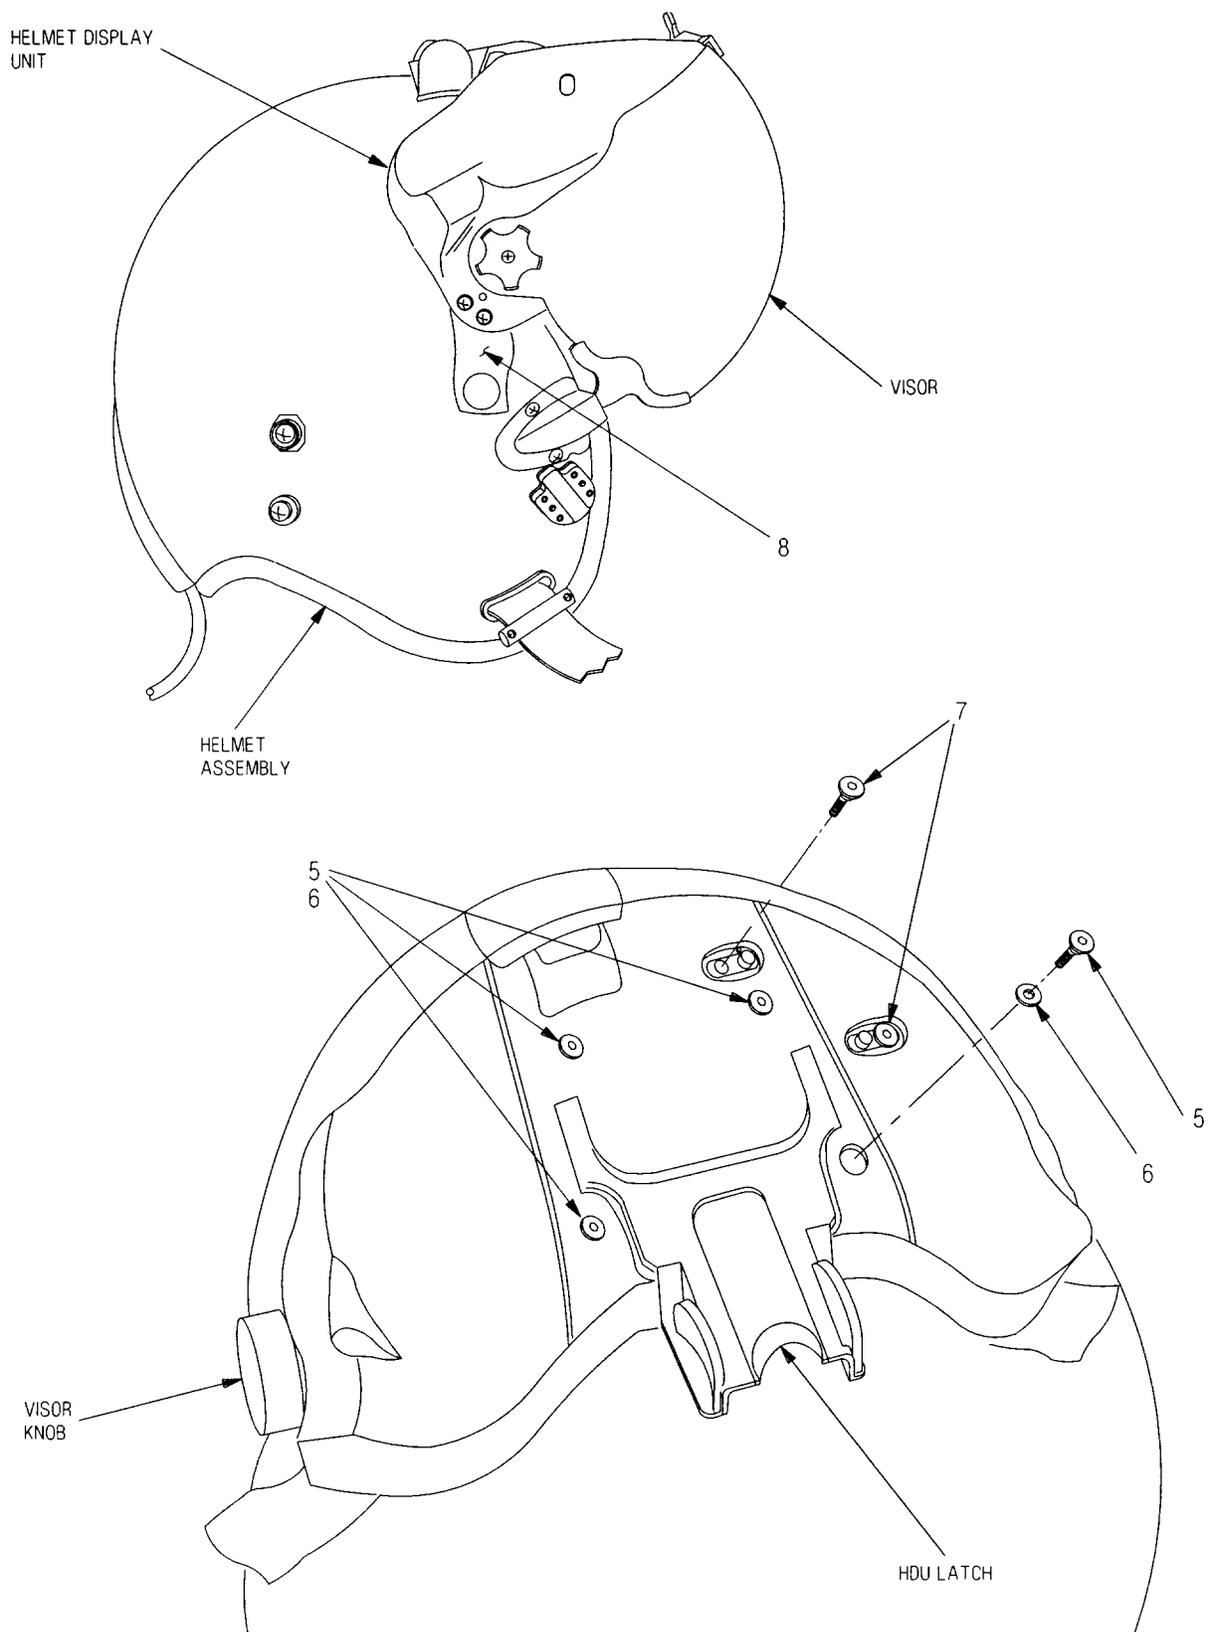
Helmet Display Unit (HDU), Part Number 620520-01-05 (Sheet 1 of 3)
